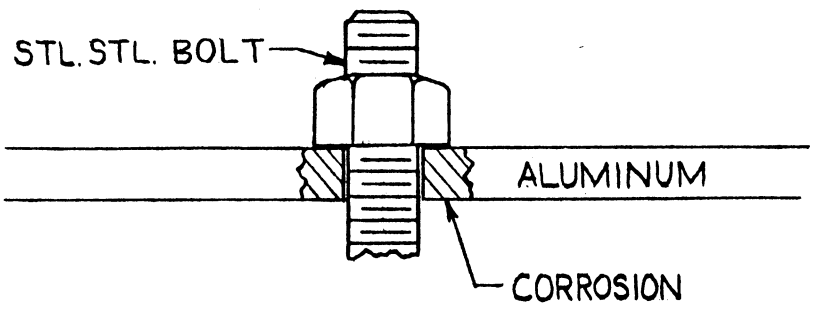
Corrosion enlarges aluminum bolt hole (Marine atmosphere)
